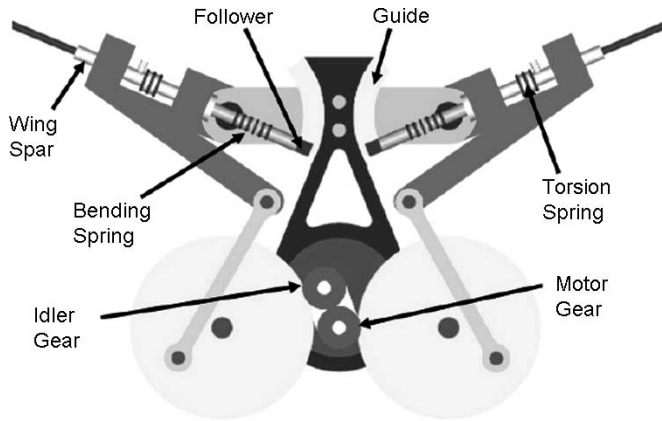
Front view of the vehicle. This view shows the four-bar mechanism that drives the wings. Notice, how the motor gear drives the right gear wheel and idler gear.
